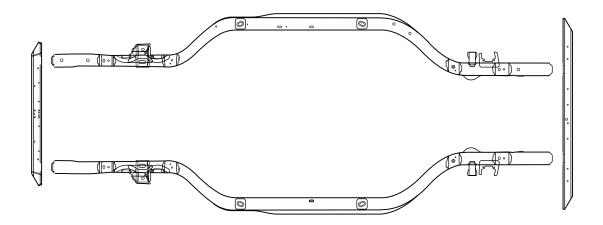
One-Piece Mild Steel Frame Rails
